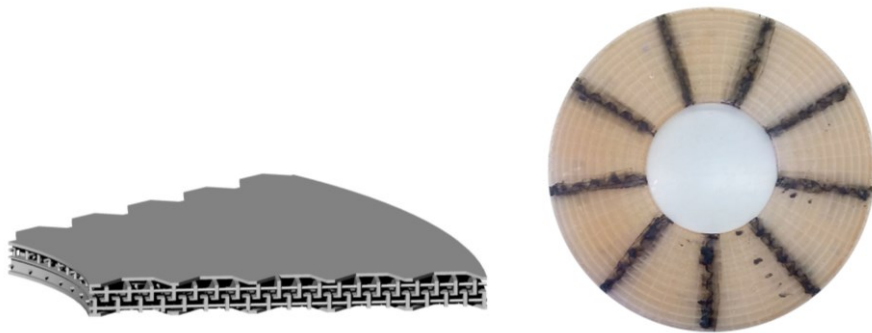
CAD model of the Zickzack packing piece and a photo of the bonded ZZ packing.
